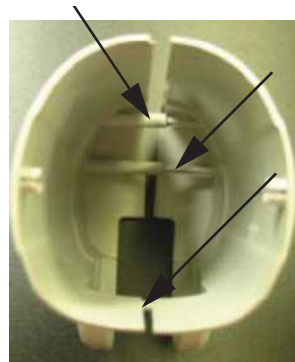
Locating the Three Pins Inside the Articulated Arm Trim Covers
